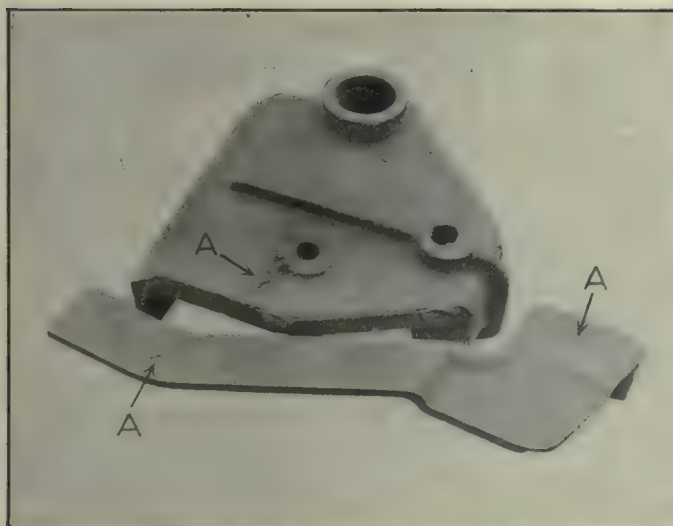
DEFECTIVE ENGINE PARTS TO BE SAVED
